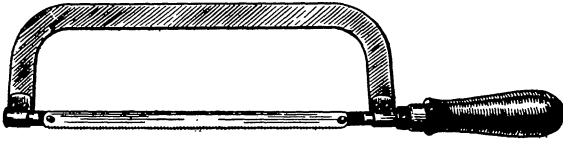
Hack saw. The thread for tightening the blade is located in the handle.
